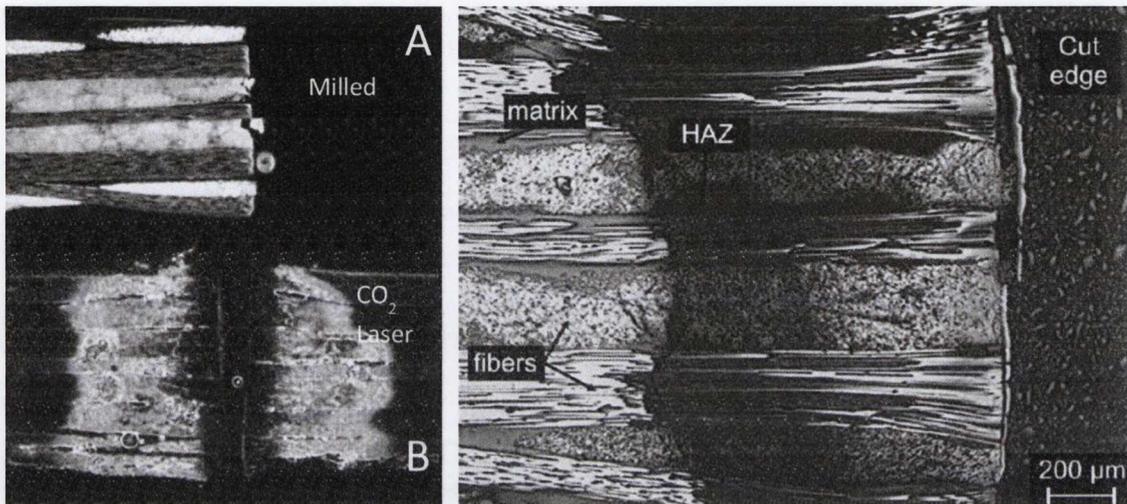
(A) Comparison of trimmed edge of CFRP composite using milling and laser ablation and (B) CO₂ Laser thermal damage to a CFRP workpiece during laser. (Adapted from [103])
